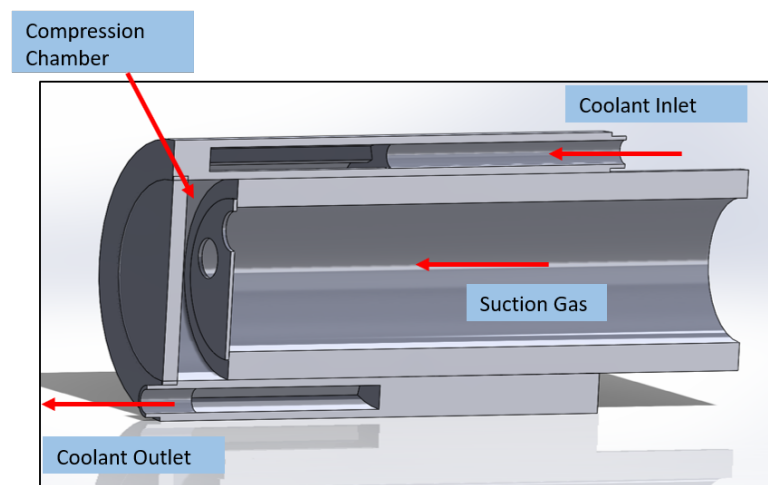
Section view of isothermal core elements of compressor in Design A.
